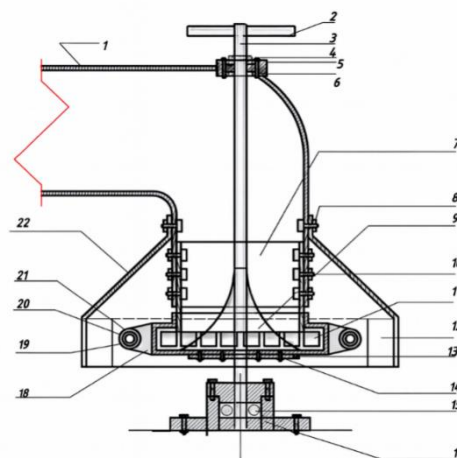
General scheme of the reaction hydroturbine with an improved internal guiding structure: 1 – water inlet channel; 2 – pulley; 3 – shaft; 4 – gland; 5 – bearing; 6 – bearing housing; 7 – supply cylinder of the improved internal guiding structure; 8 – stationary housing of the hydroturbine and fixing bolts; 9 – conical diffuser of the guide device; 10 – attachment bolts of the guide device to the supply pipe; 11 – guide vane profile; 12 – water-returning blades of the stator; 13 – runner cylinder; 14 – cylindrical base connecting the runner to the shaft; 15 – lower base bearing fixed to the dam; 16 – base bearing housing; 17 – platform; 18 – water inlet channel to the nozzle; 19 – nozzle working body; 20 – nozzle diffuser; 21 – water outlet channel and diffuser; 22 – stator of the hydroturbine.
